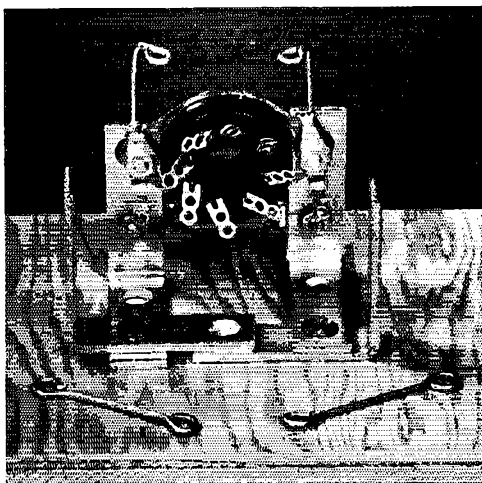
First steps in assembly, showing the manner in which the angle pieces are fastened to the baseboard. Much of the wiring can be done before fastening to the baseboard as described in the text. The pair of looped wires in the foreground show how the crystal-socket supports are made.
